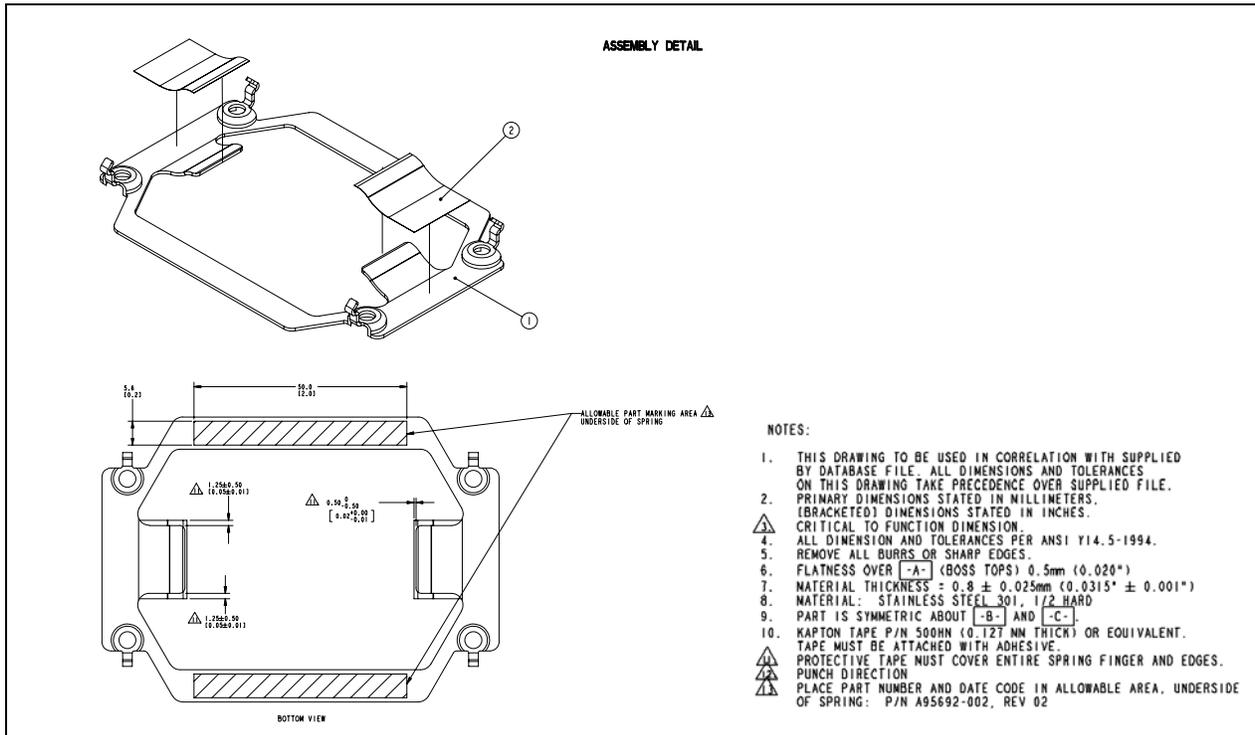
Cooling Solution Hat Spring (Sheet 2 of 3)
